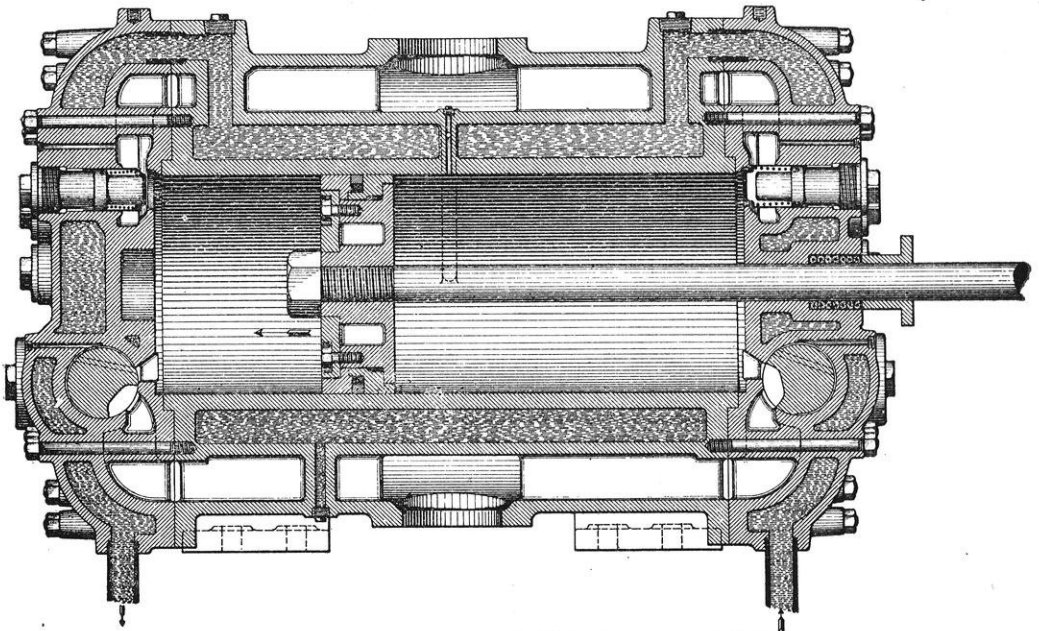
Section of Nordberg Corliss Valve Compressor Cylinder.
